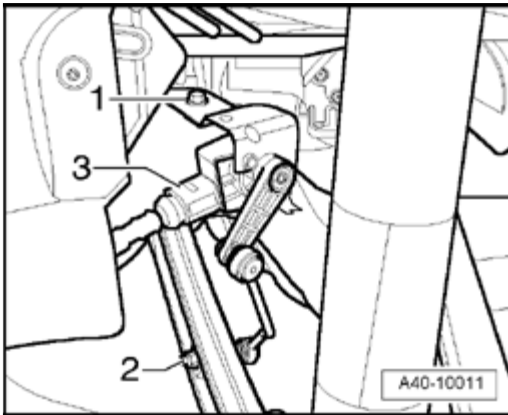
Identifying Harness Connector, Hex Nut, And Hex Bolt
